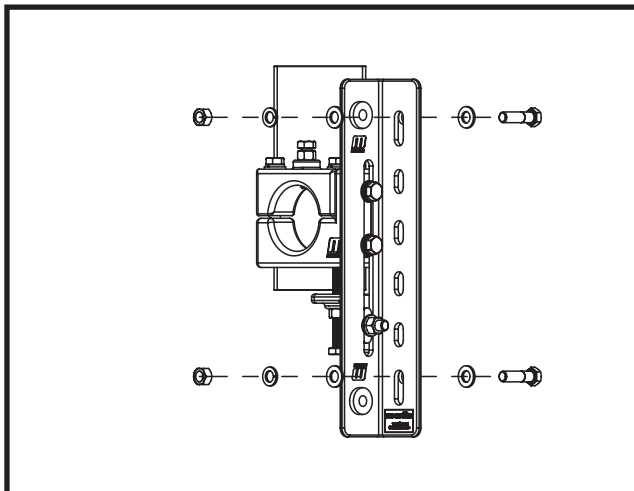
Martin® P2 Secondary Belt Cleaner HD Far Bolt Tensioner Mount Bracket Hardware
